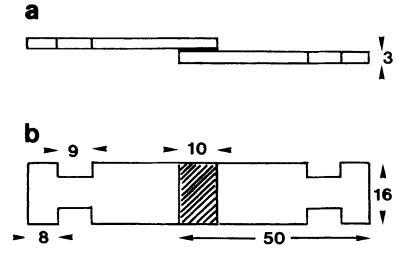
Dimensions of the joints used in the study. All dimensions in mm. (a) side view, (b) plan view.
